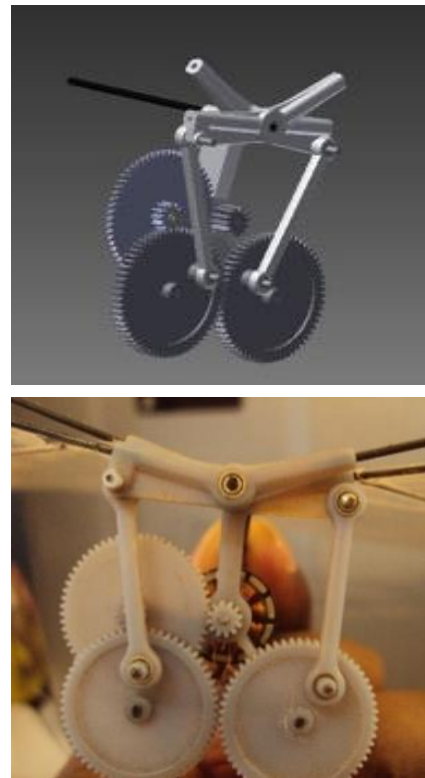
CAD model and FDM prototype of dual crank mechanism
